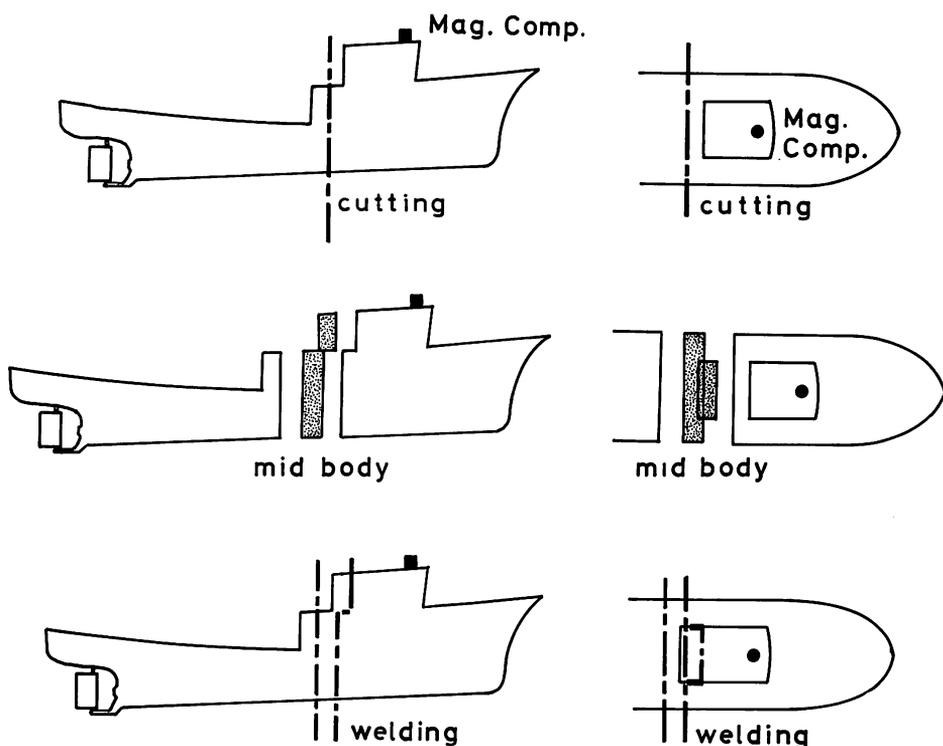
The place of cutting, mid body, welding and the magnetic compass.
